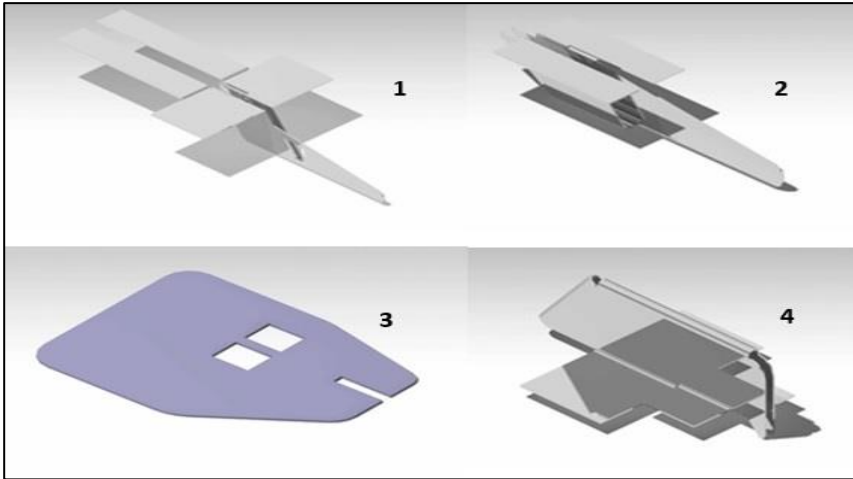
Designed tool parts. (1) Blade holder, (2) paper spreader, (3) tool base, and (4) tool holder
